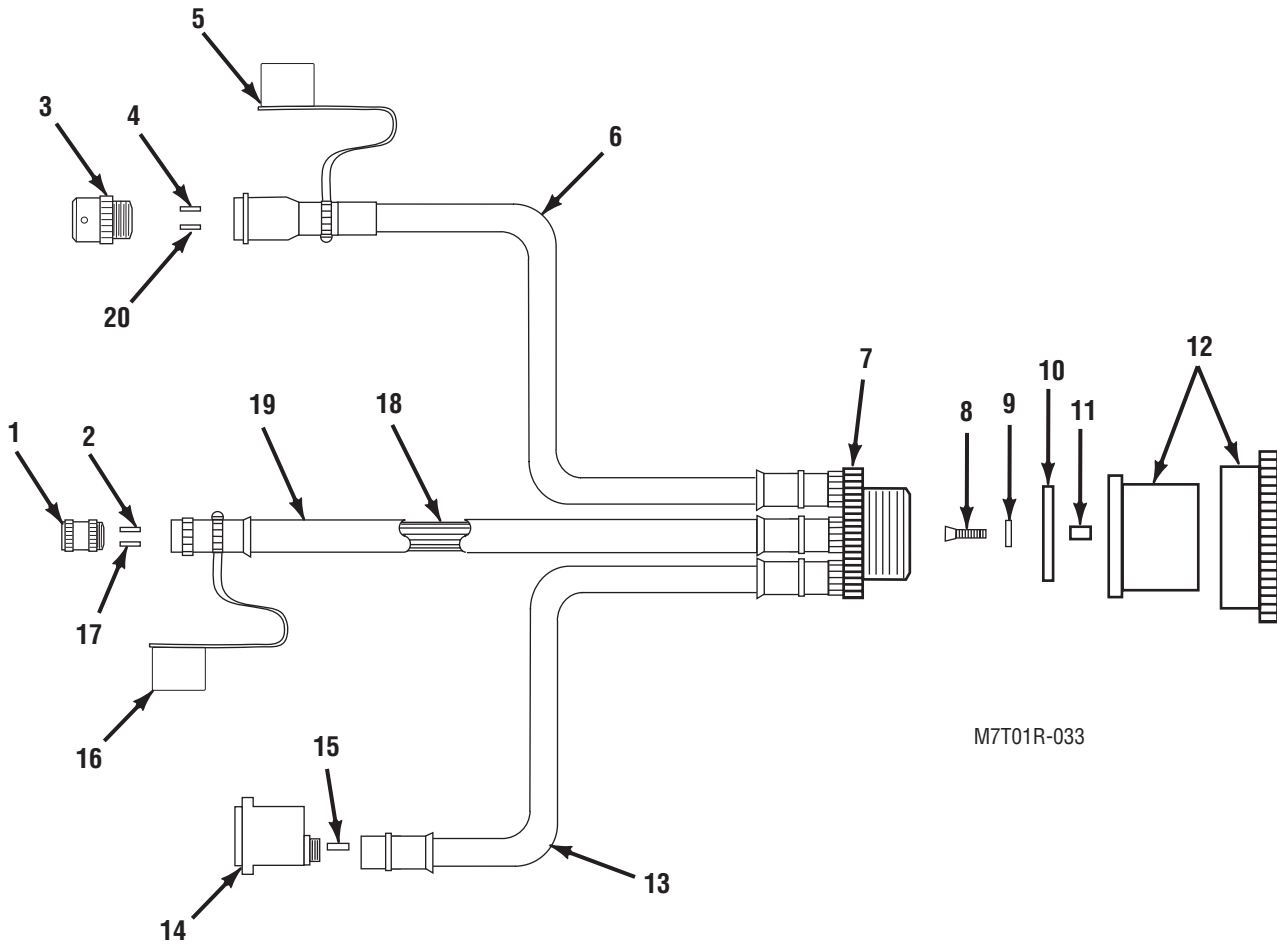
Group 01B07 GPIA Functional Self Test Cable Assembly (W34) 9358420
